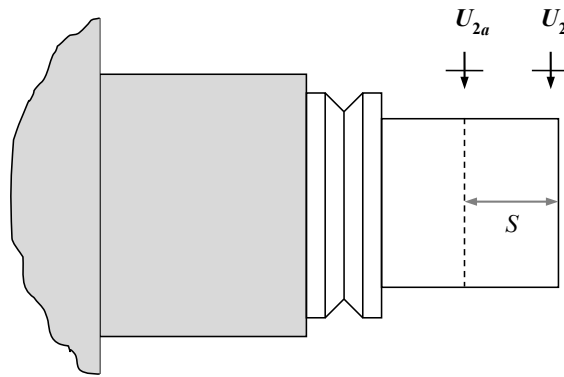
Direct and cross artifact-spindle-machine assembly measurement locations used to determine assembly rotation-to-force receptance N_{22} .
